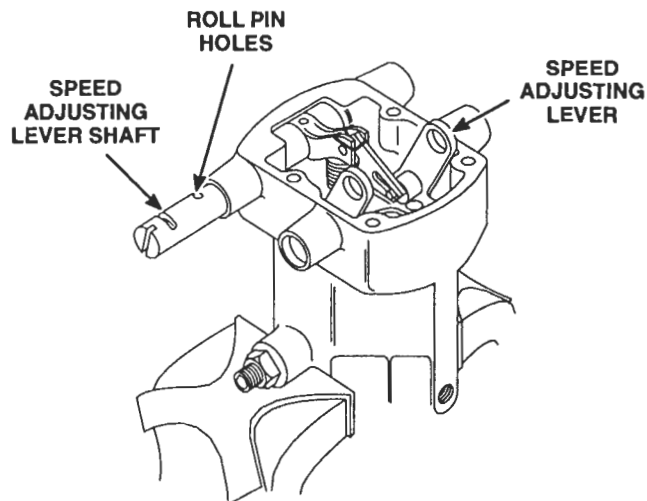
Installing Speed Adjusting Lever Shaft in Governor Housing and Adjusting Lever
